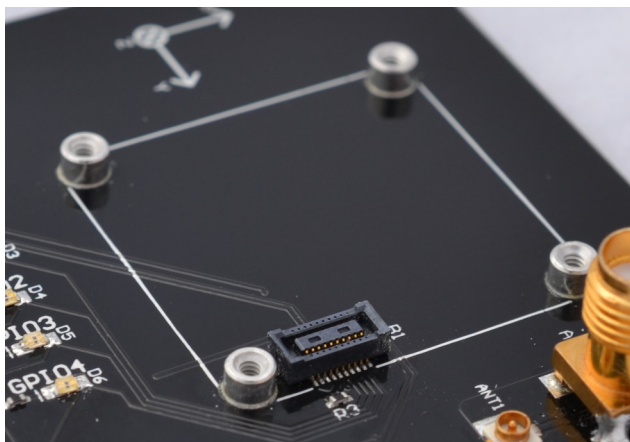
Photo of Spatial OEM's mounting hardware on target PCB
